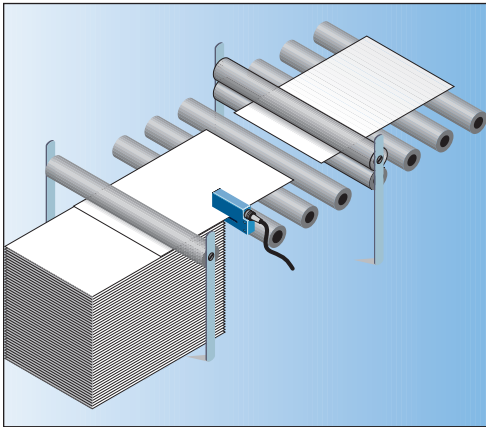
The fork sensor detects double sheets of paper on conveyor belts carrying material to a paper cutter
